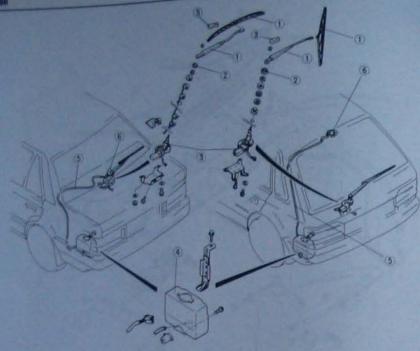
Exploded view of the railgete/rear window wiper and washer system components - September 1985 onward Saloon and Hatchback models (Secs 23 and 25)
